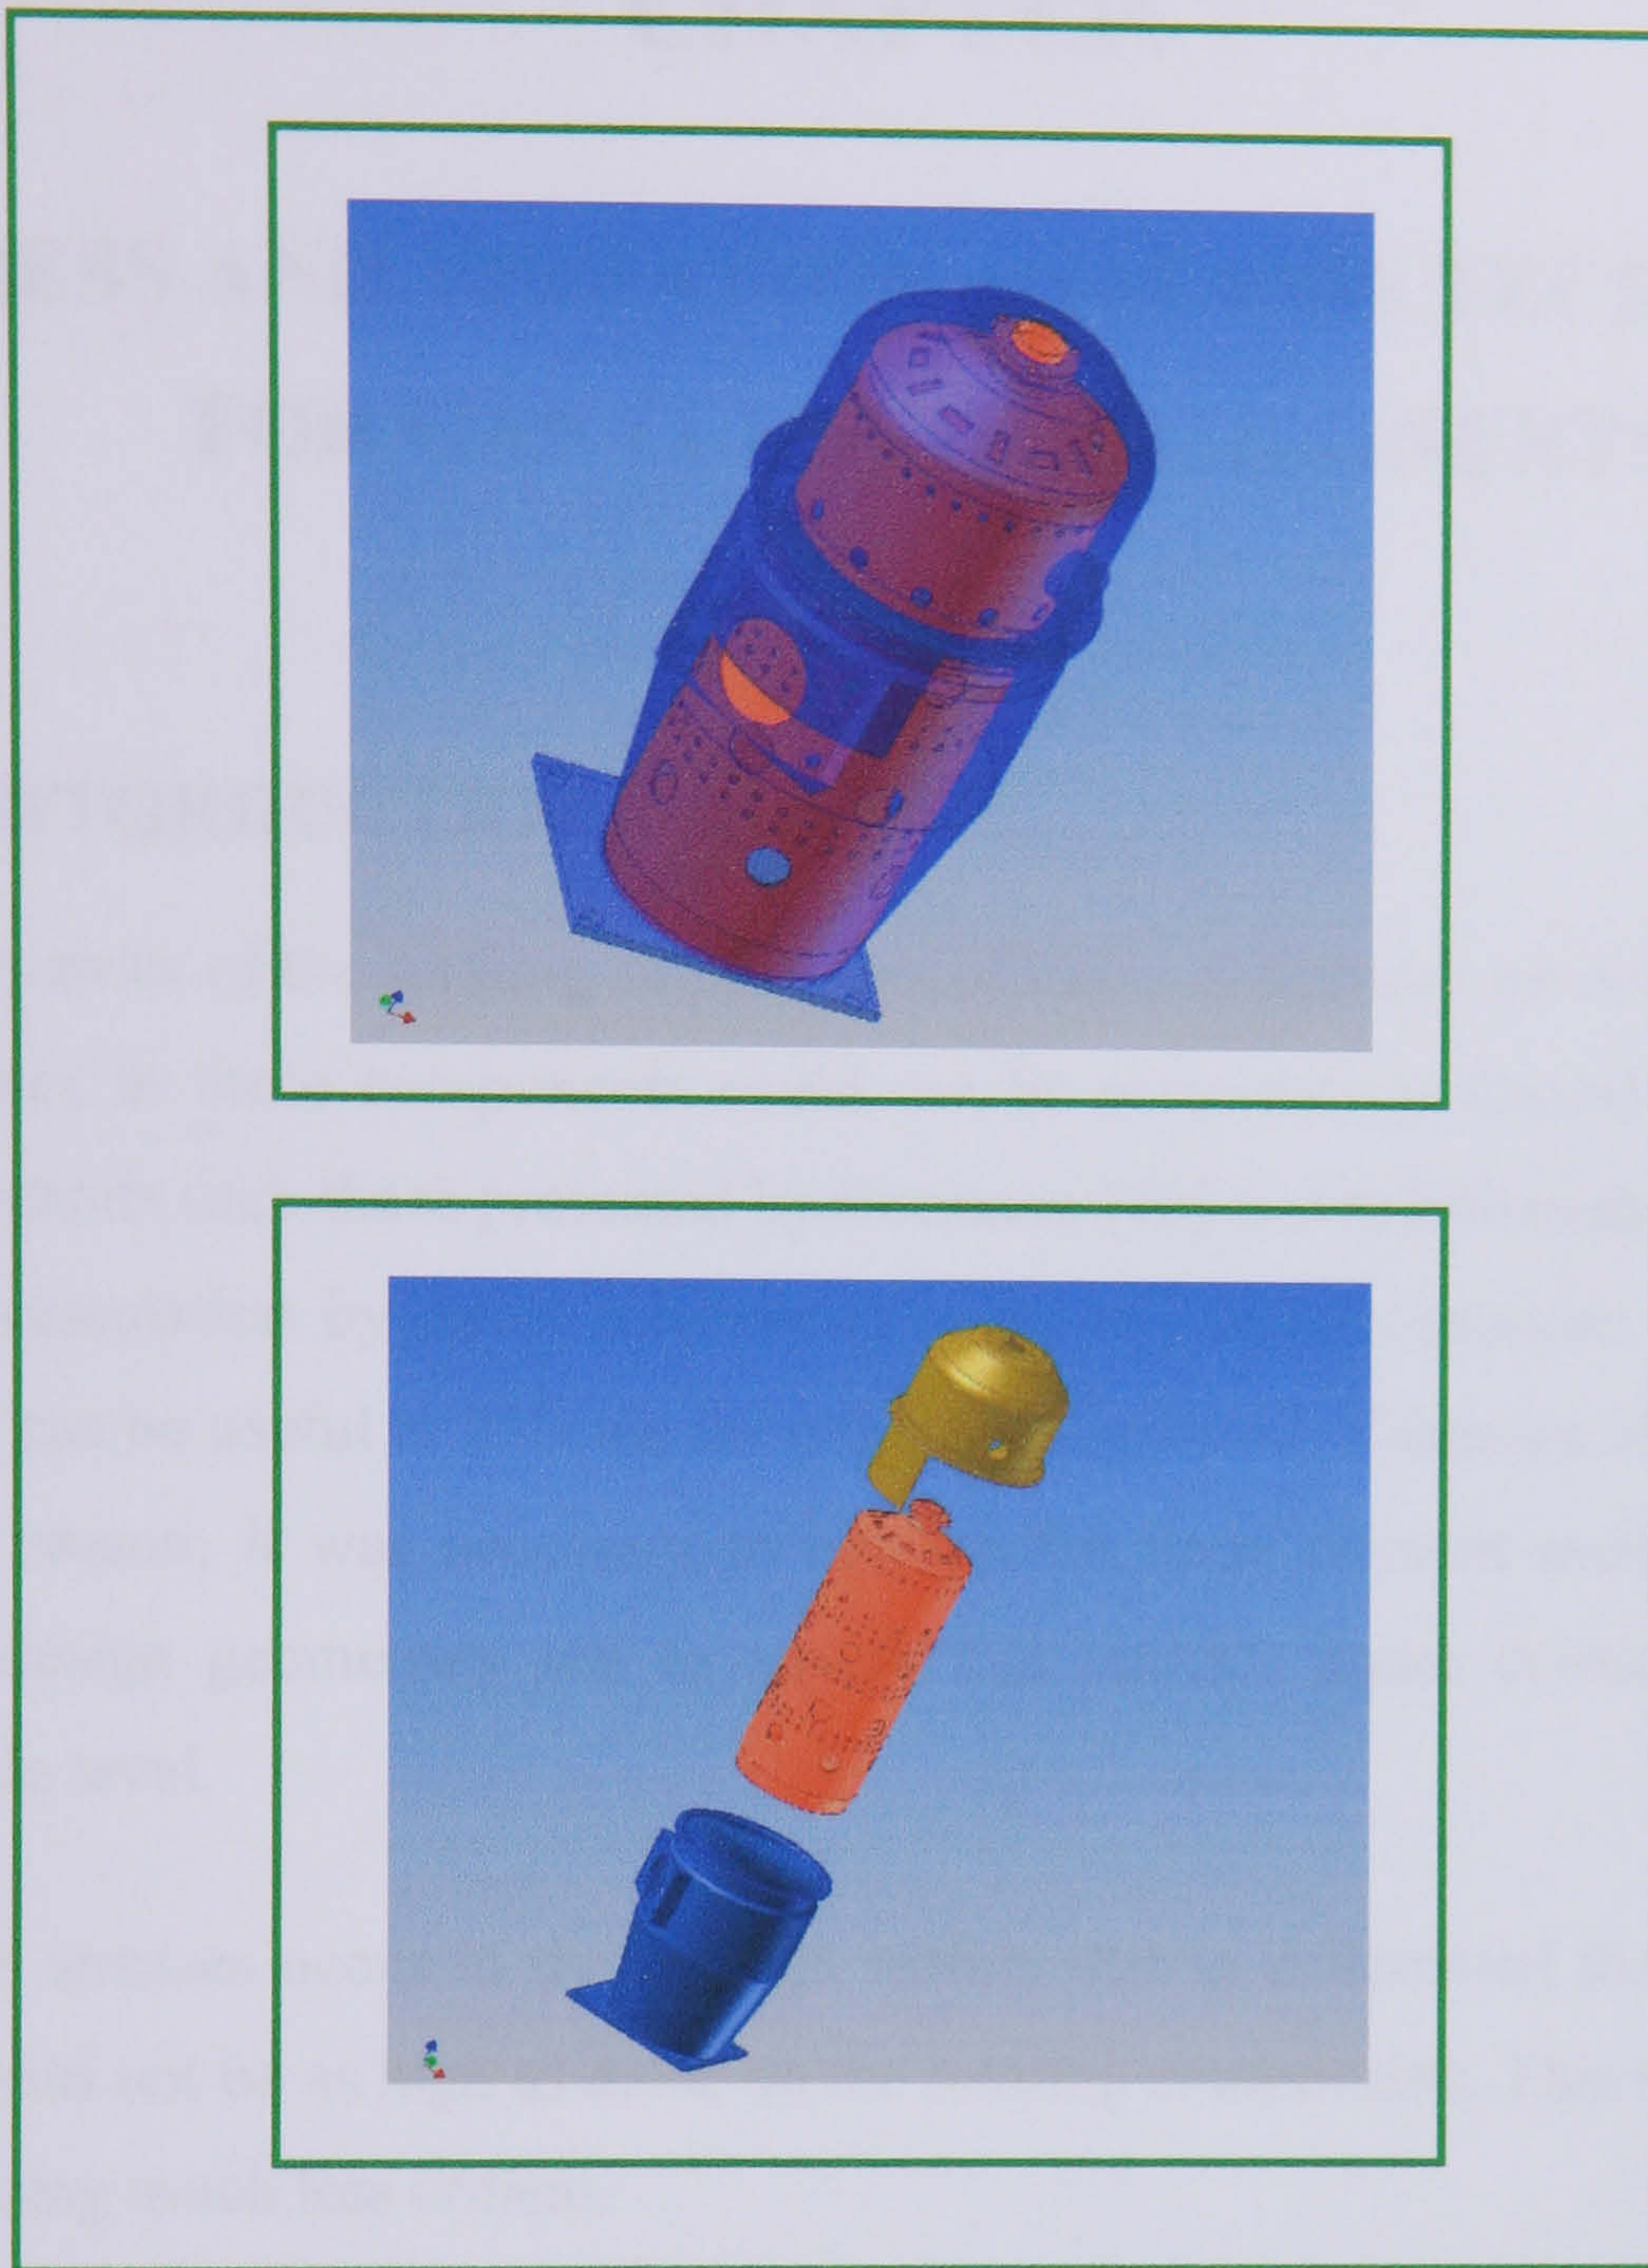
EXPLODED VIEW OF COMBUSTION CHAMBER ASSEMBLY
